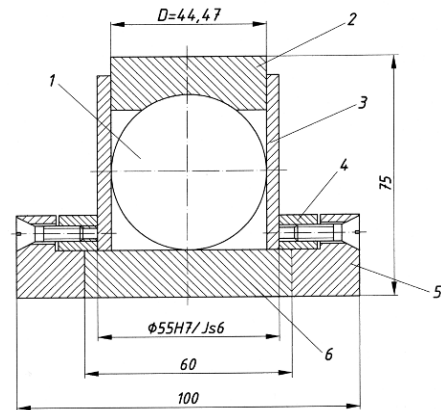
Scheme of a device for measuring impact force by the elastic contact method: 1 - ball; 2 - a punch; 3 - sleeve; 4 - case; 5 - emphasis; 6 - plate
